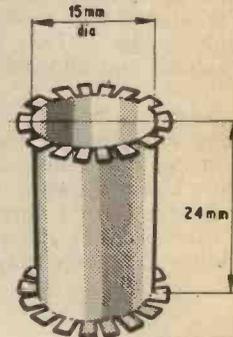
Dimensions of a suitable bobbin. This size will fit most line-output transformers
